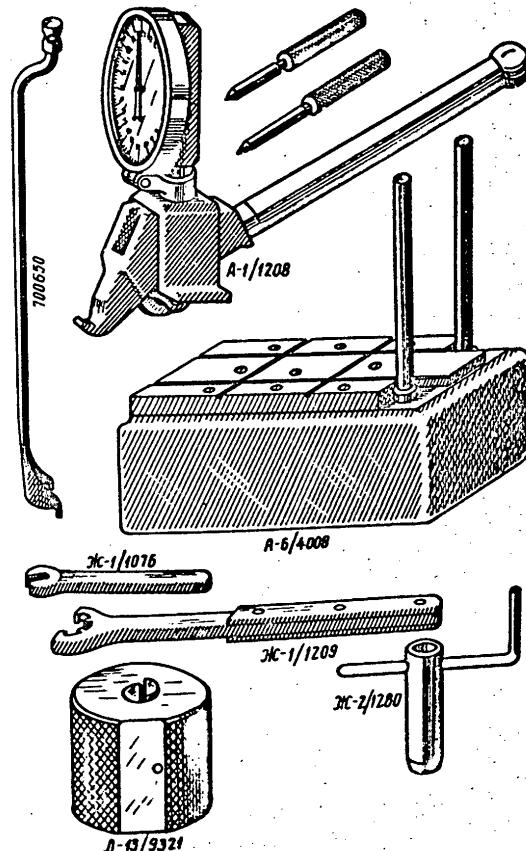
TOOLS AND FIXTURES FOR ASSEMBLY OF CYLINDERS AND PISTONS
